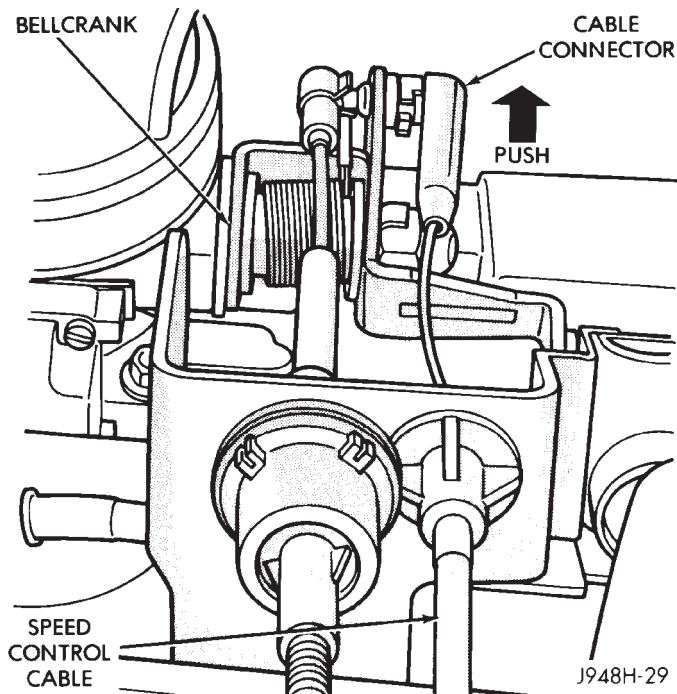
Remove Bellcrank Connector - 5.2L Engines
